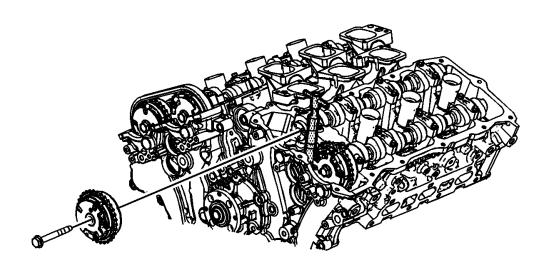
View Of Exhaust Camshaft Position Actuator Bolt Courtesy of GENERAL MOTORS COMPANY
